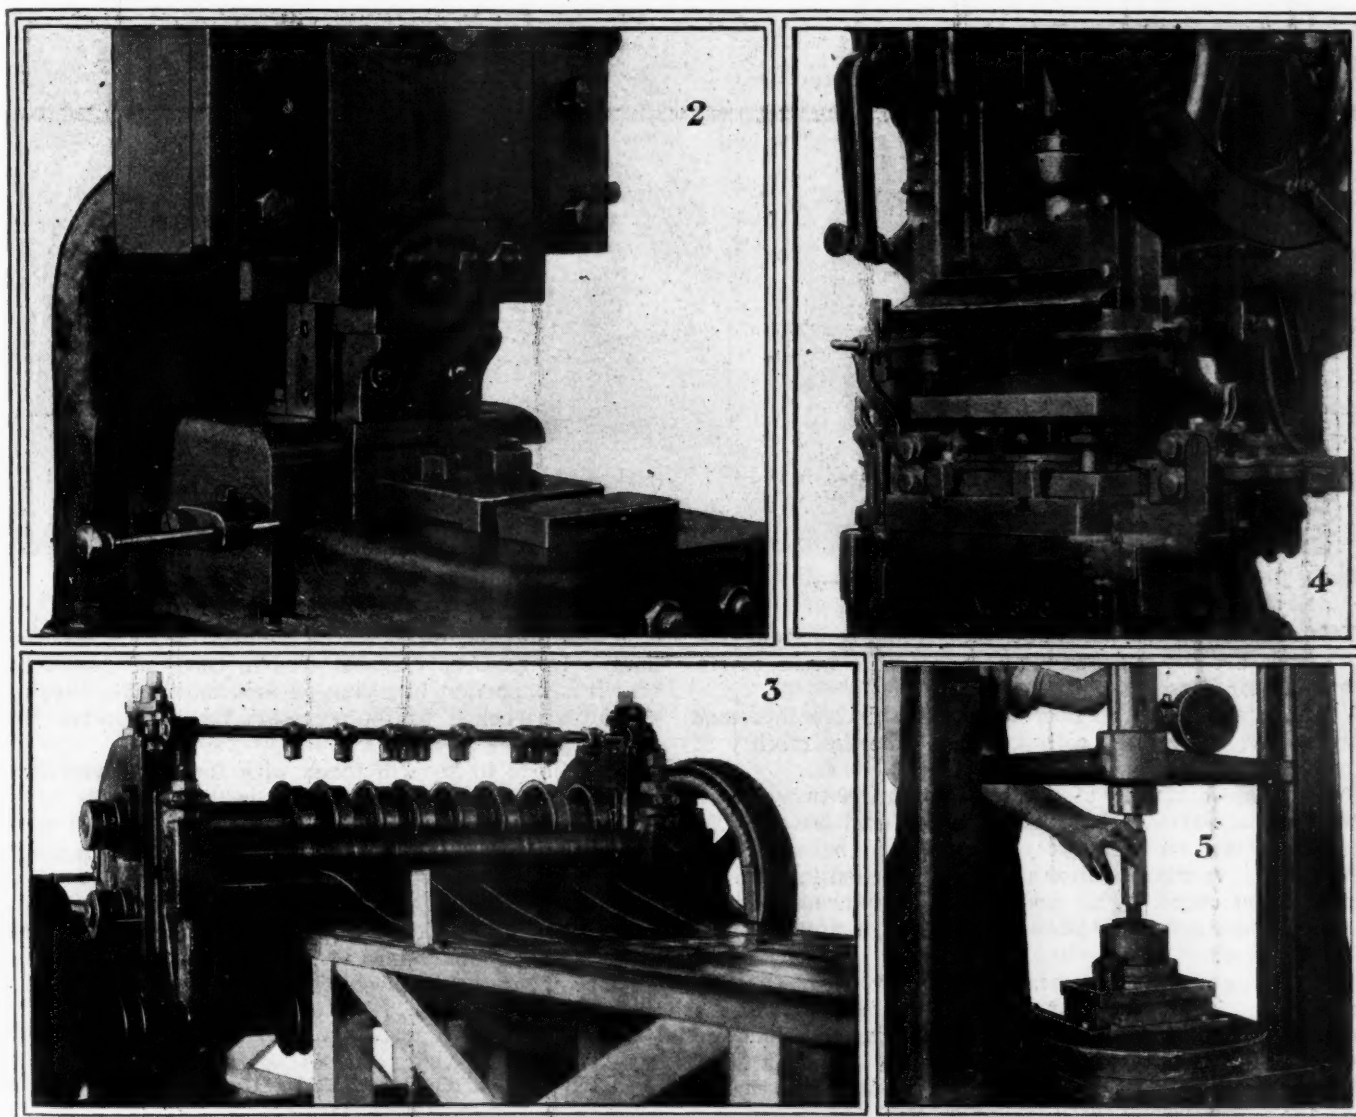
Knurling machine. Fig. 3—Rolls used in slitting metal to sizes suitable for punch press in punching core laminations. Fig. 4—Roller feed punch press and dies used in stamping core laminations. Fig. 5—Assembling core laminations to shaft
